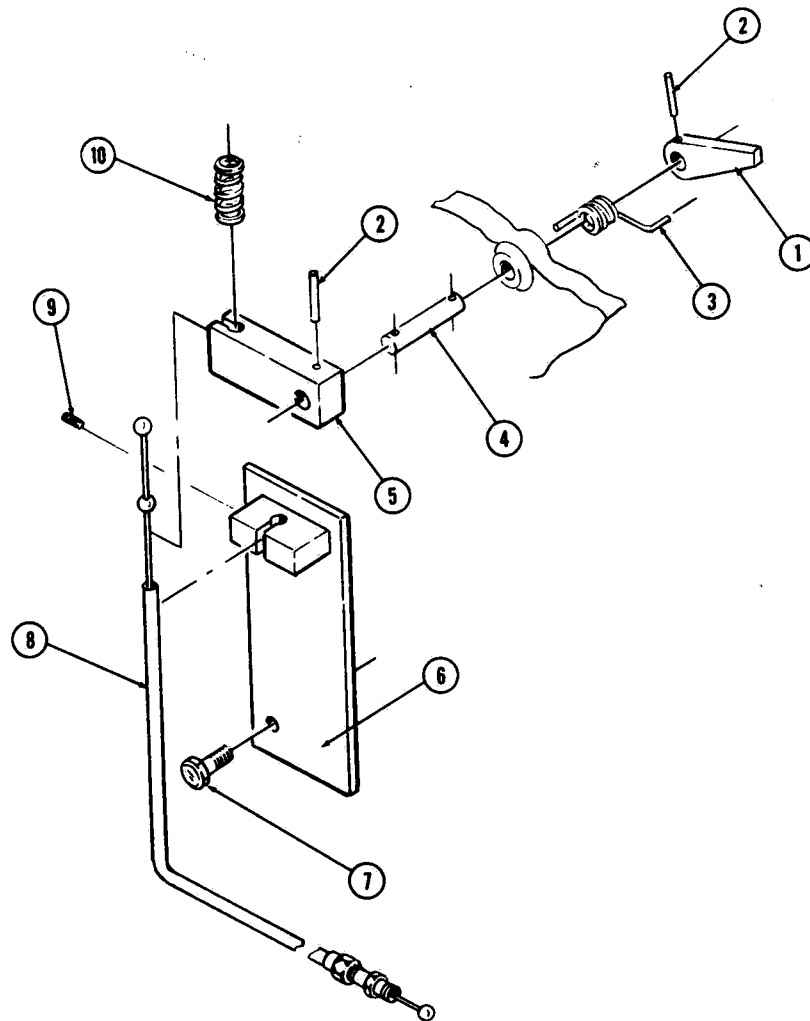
DOOR LOCK AND HINGE ASSEMBLY (Part 3 of 3).
